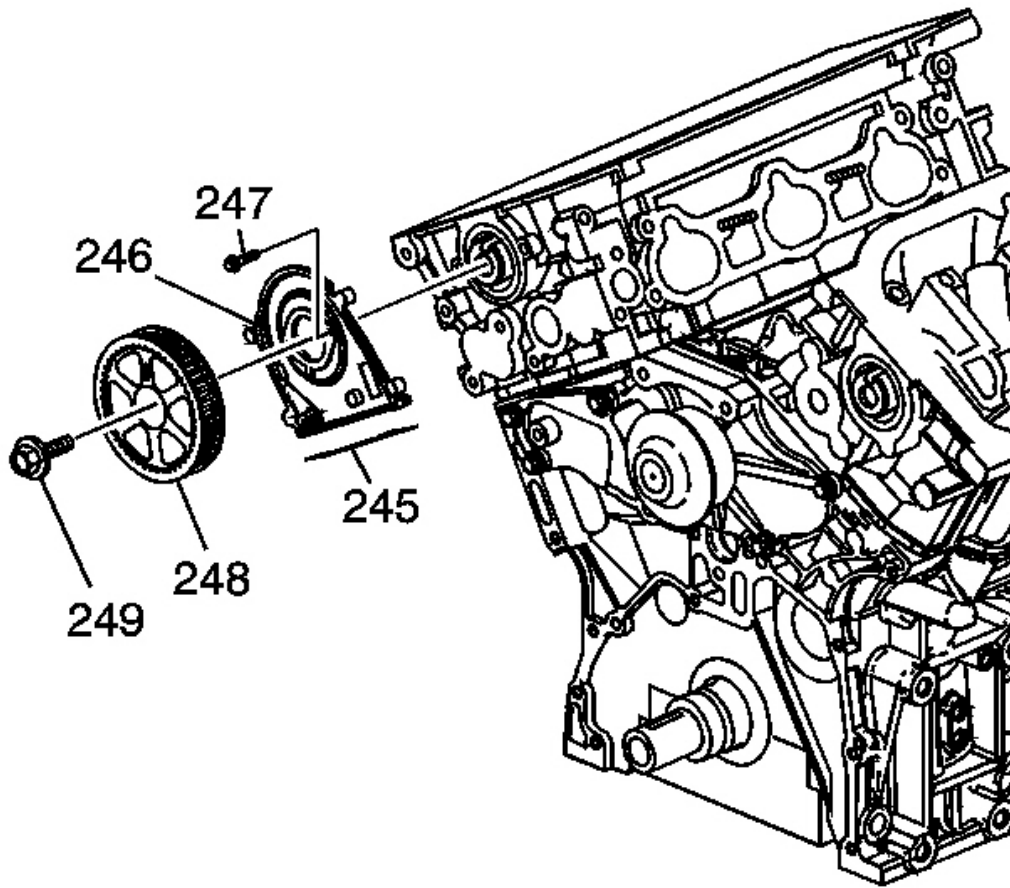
View Of Bolt, Sprocket, Bolts, Cover & Seal
